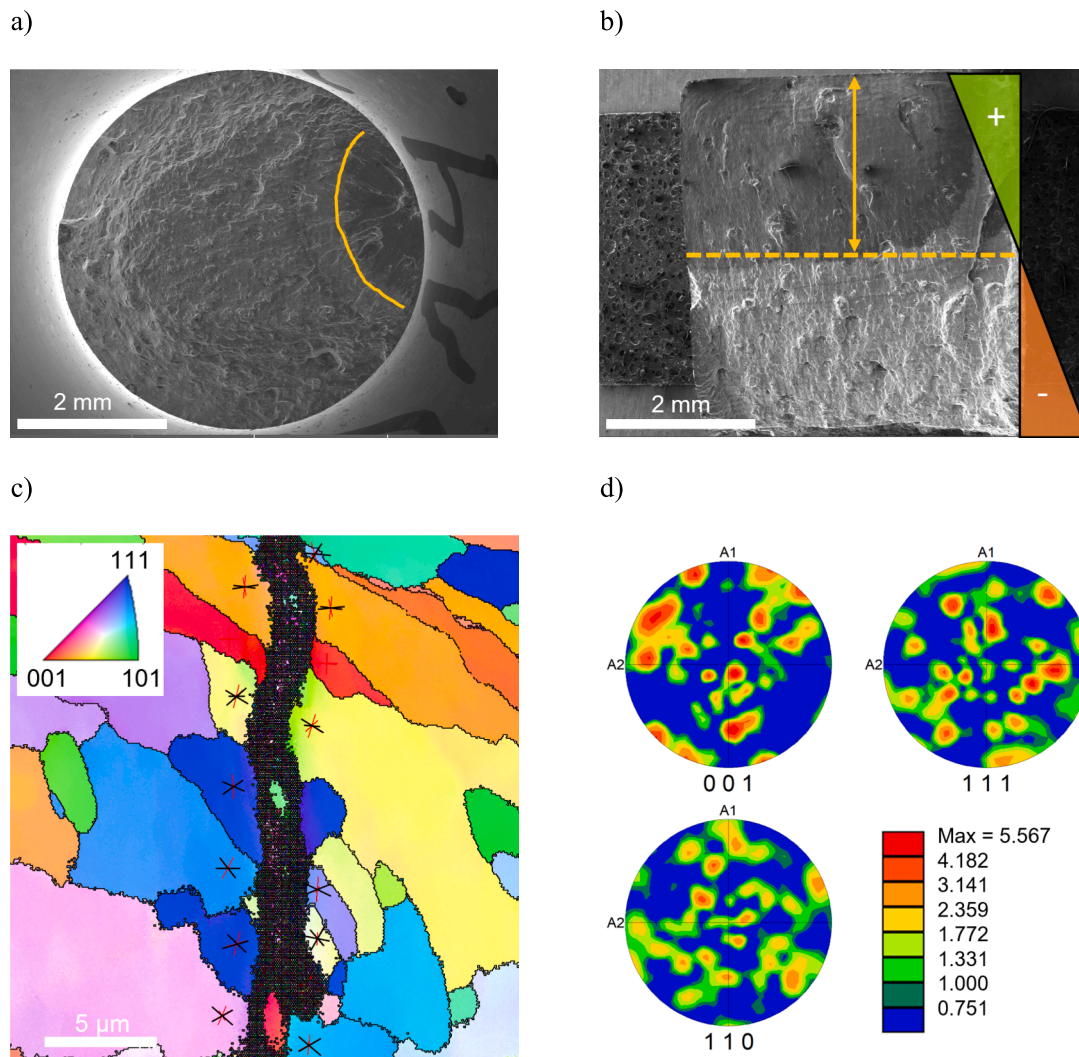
SEM-fractography of a) standard uni-axial specimen, b) mini-bending specimen, c) inverse pole figures of mini-bending AISi10Mg in crack area, determined by EBSD, and d) pole figures for the ODF.
